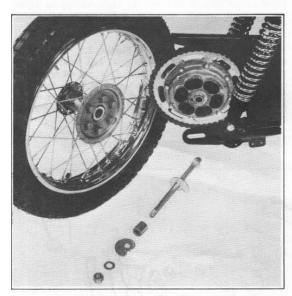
Separating Rear Wheel and Brake-Sprocket Assembly
